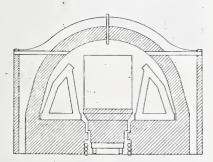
Schematic drawing of Dressler kiln through firing zone.
